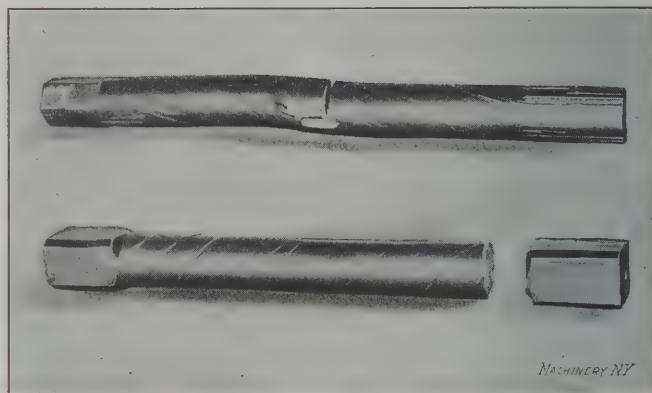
Condition of Shafts Broken in Tests shown in Fig. 17; the Gears were Uninjured
